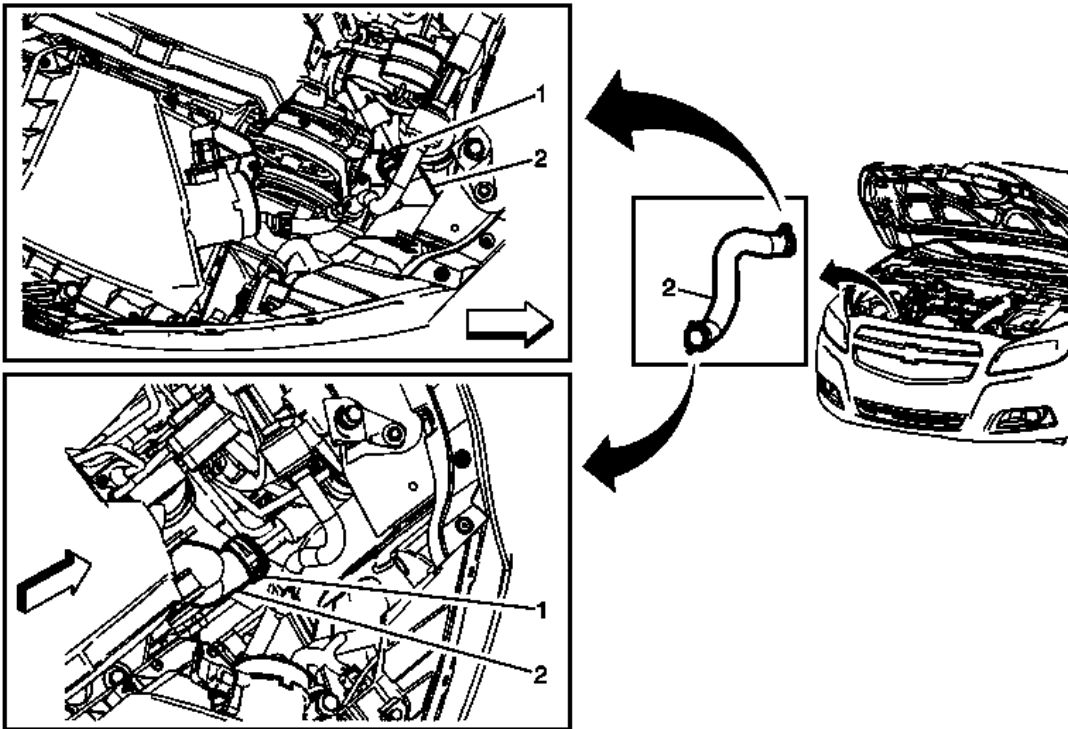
Radiator Outlet Hose & Clamps (LTG)
